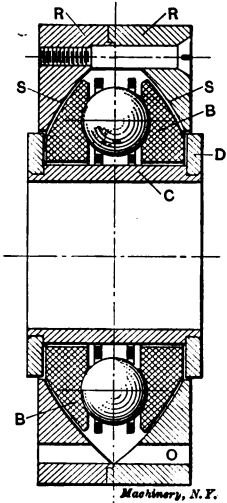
Bearing Designed for Axial Thrust in Either Direction
